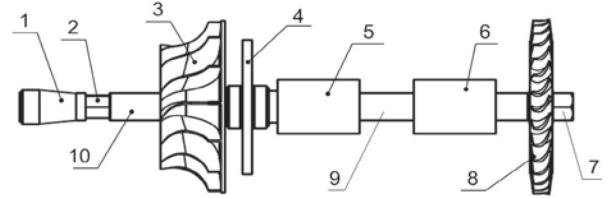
Diagram showing the components of compressor drive unit rotor assembly of the turbine engine, 1- clamping sleeve with the internal splines, 2- clamping nut from rotor compressor, 3- compressor rotor, 4- thrust disc of axial bearing, 5, 6- radial bearing sleeve, 7- clamping nut from rotor of compressor drive unit turbine, 8- rotor of compressor drive unit turbine, 9- compressor drive unit shaft, 10- compressor rotor sleeve, own study.
